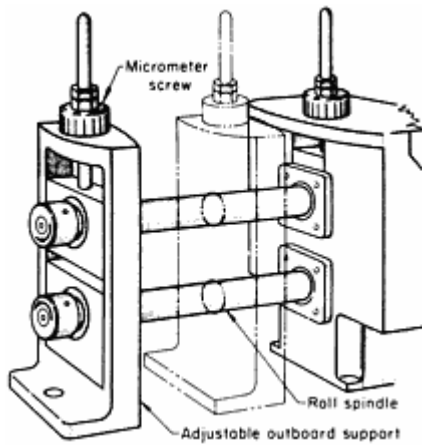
Universal contour roll forming machine, with outboard support for roll shafts (rolls not shown)
